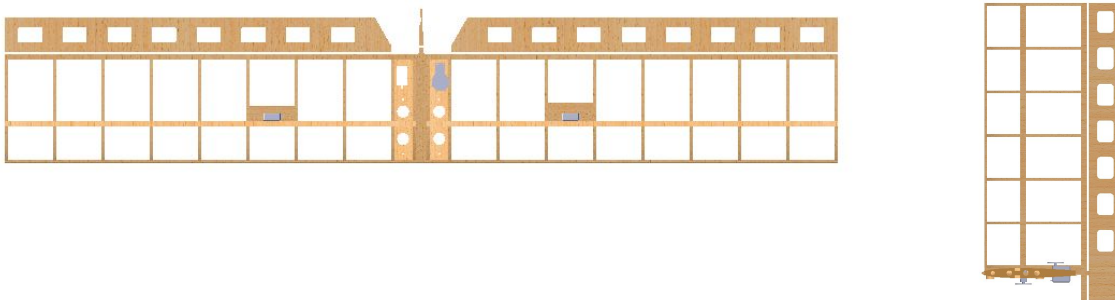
Tail Section Vertical and Horizontal Stabilizer
